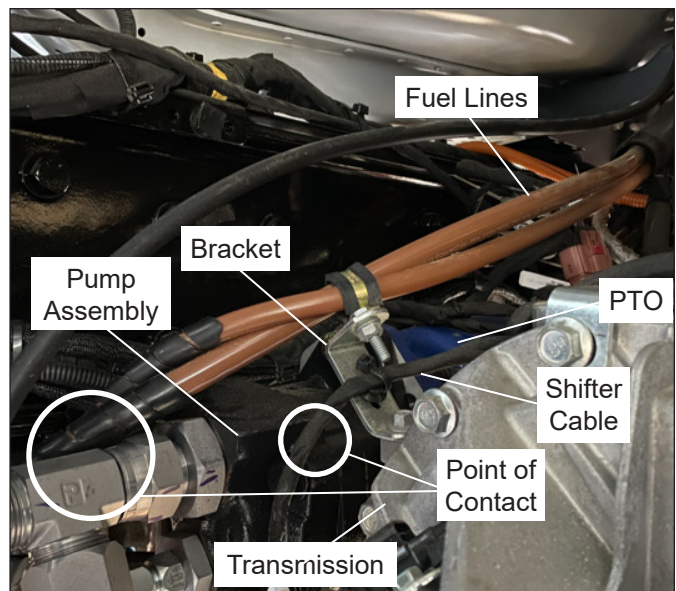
Fuel Lines and Shifter Cable Inspection Angle Two (Shifter Cable Contacting Pump Assembly)
